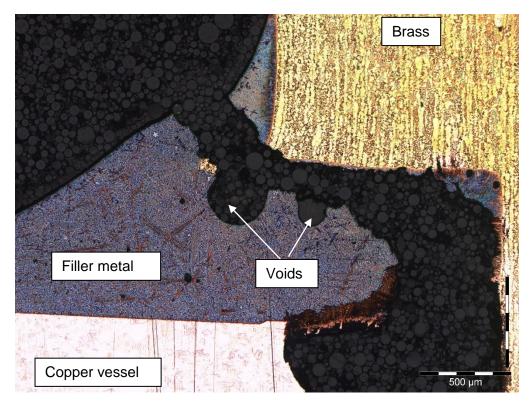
Cross section through fracture in filler metal (sample has been etched) (Image No. 14133 met-2-2.jpg)
